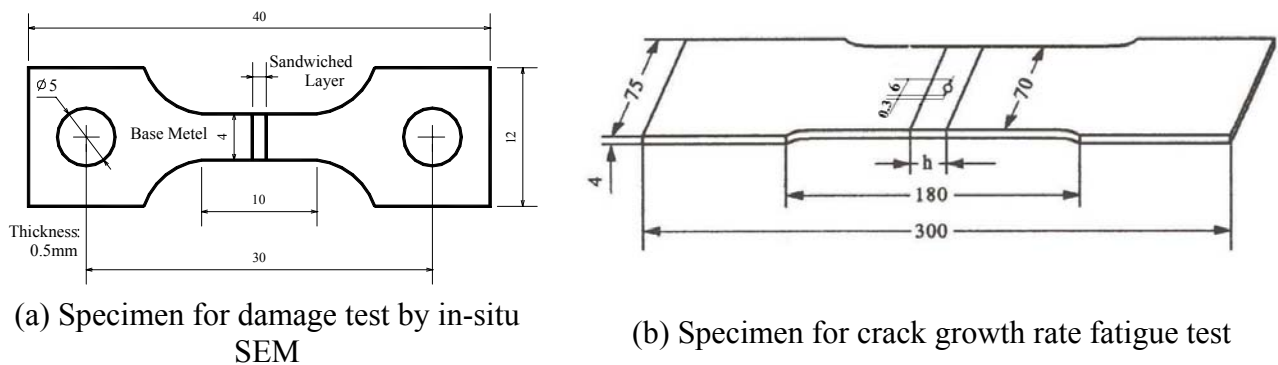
Geometry and dimension of the specimens for damage and fatigue tests (dimensions mm).
